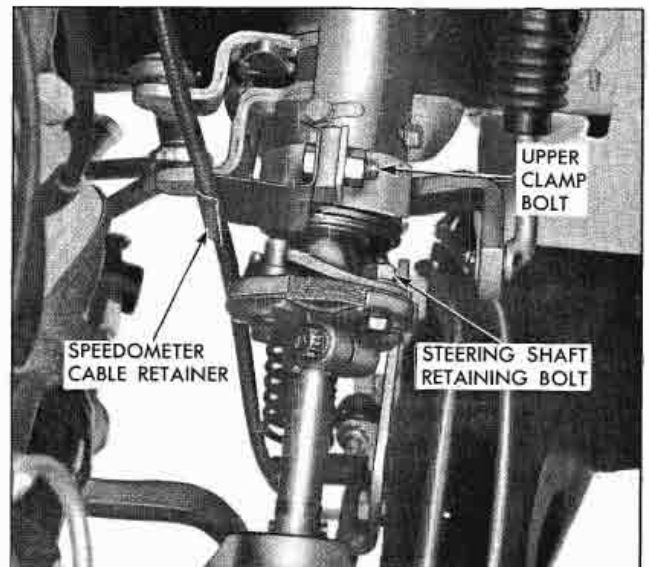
Steering Shaft to Steering Gear Retaining Bolts
